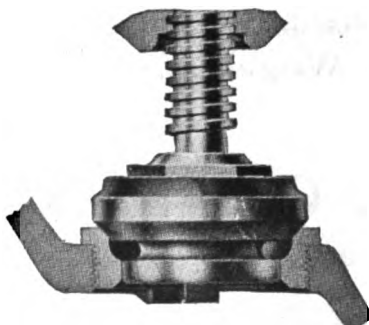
The valve closed. The unscored seats form a leak-proof joint.
